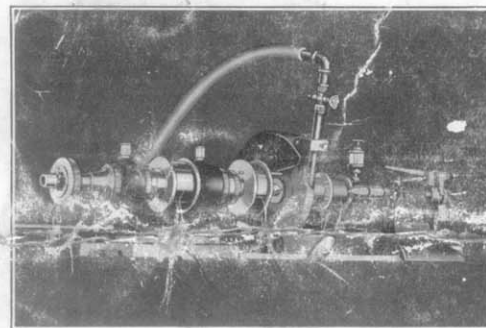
External Grinding Attachment for countershaft-driven grinder
